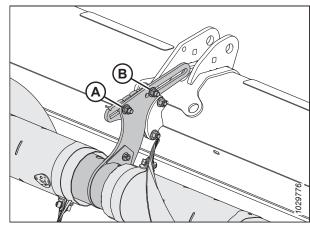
Initial Position of Adjustable Mounts – Two-Piece Auger
